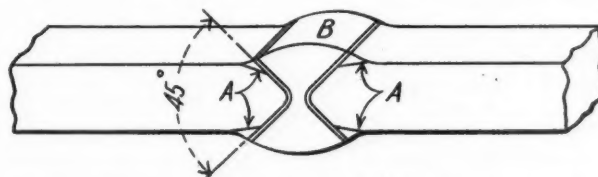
Type of Weld Used in Repairing Frame Under Engine.
